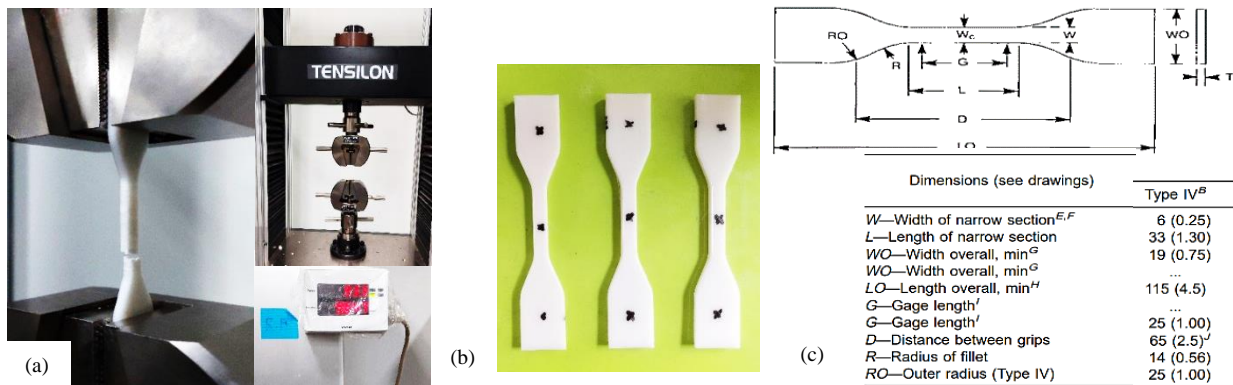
Tensile test (a) Machine, (b) Specimens, and (c) Dimension specimens [8]
